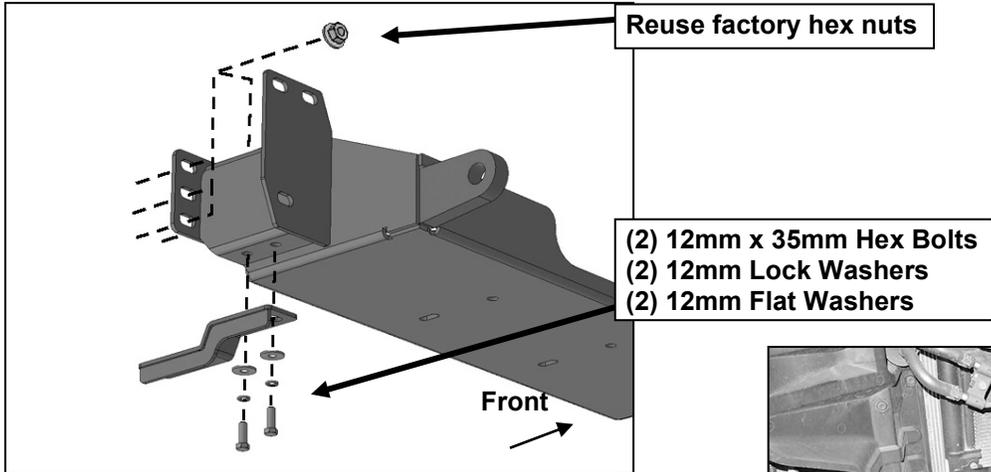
Reuse tow hook bolts to attach passenger/right Support Bracket to bottom of frame
